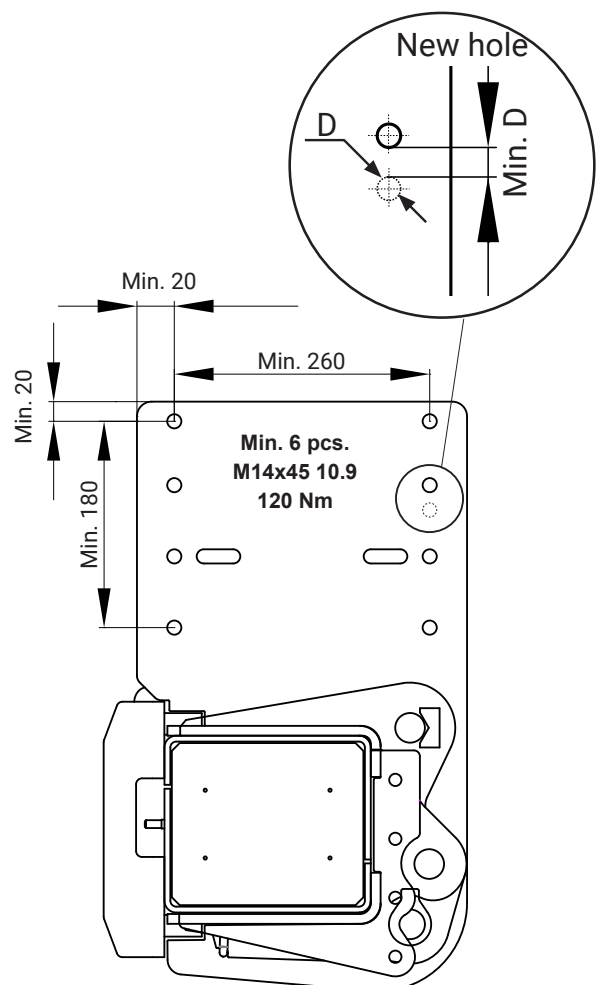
Install the chassis bracket with at least six M14x45 10.9 bolts
